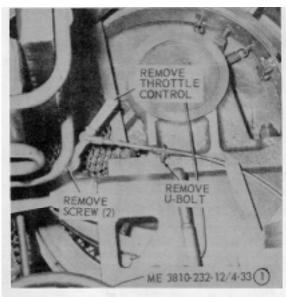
Crane engine throttle control assembly removal and installation. Sheet 1of 2.
